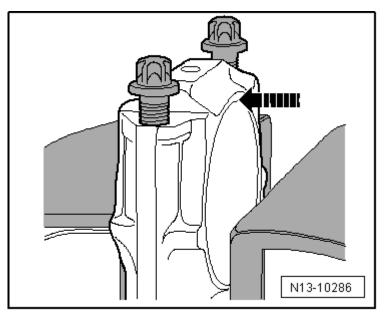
Identifying Connecting Rod Clamped In Vise Equipped With Aluminum Protective Pads Courtesy of VOLKSWAGEN UNITED STATES, INC.
